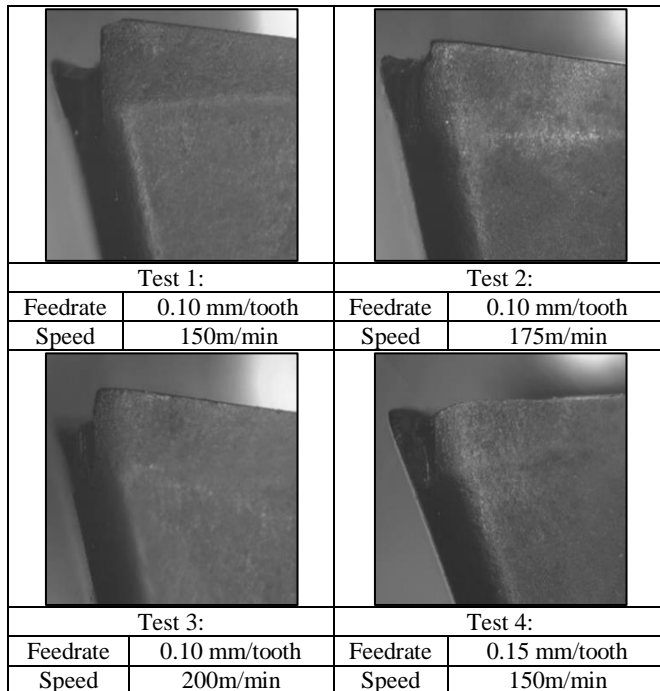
Tool wear of TiAlN coated carbide indexable insert under different cutting parameters
